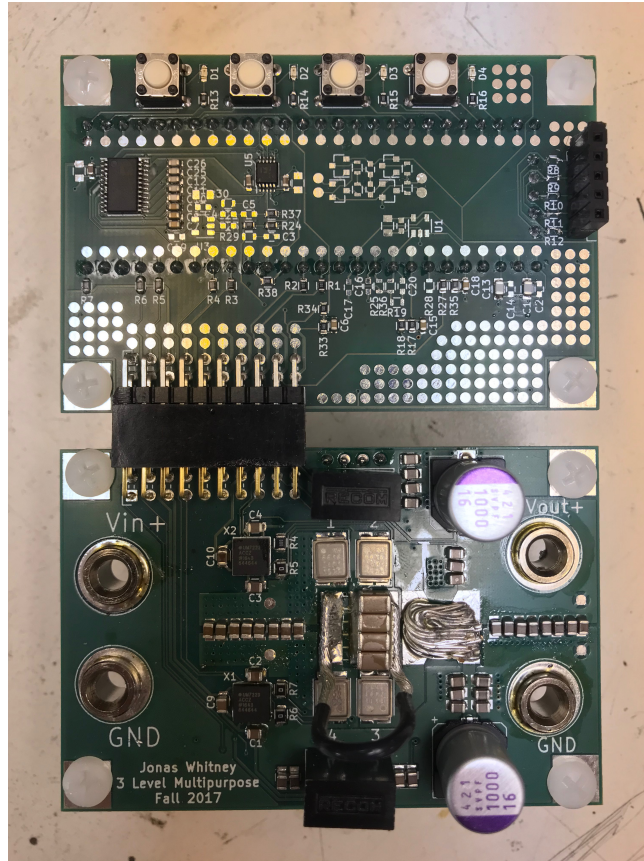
Top of the ResSC power PCB connected to a control PCB.
